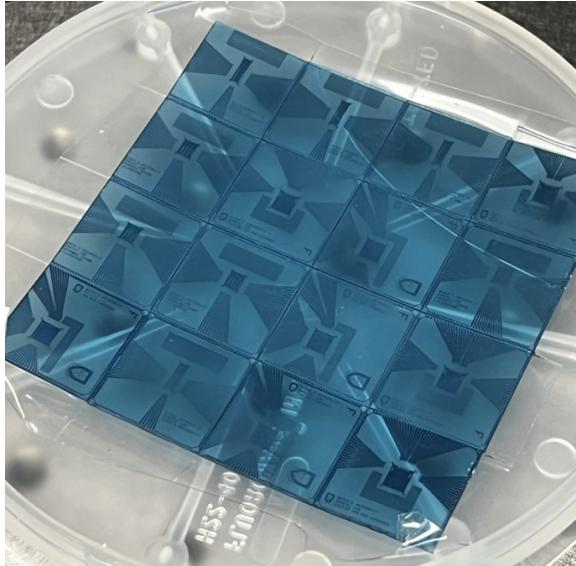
Diced glass expander used for photonic integrated circuit packaging
